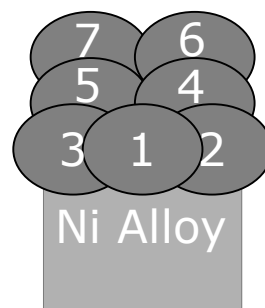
Schematic view of the bead arrangement in dual bead on edge, note that the bottom layer has three layers to mitigate undercut.
